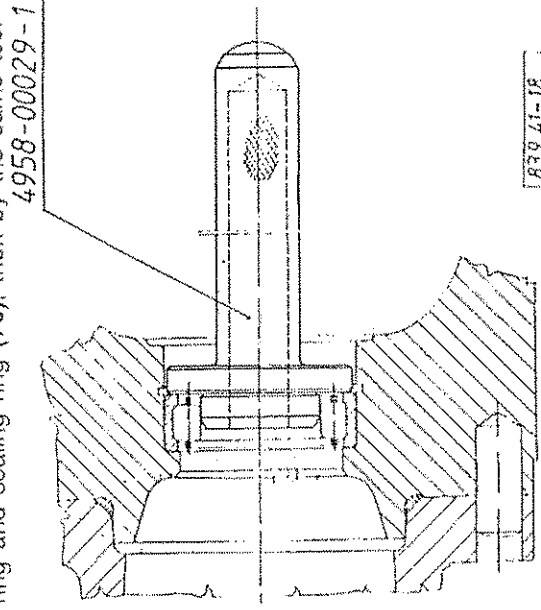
DRIVING IN THE CYLINDRIC ROLLER BEARINGS
